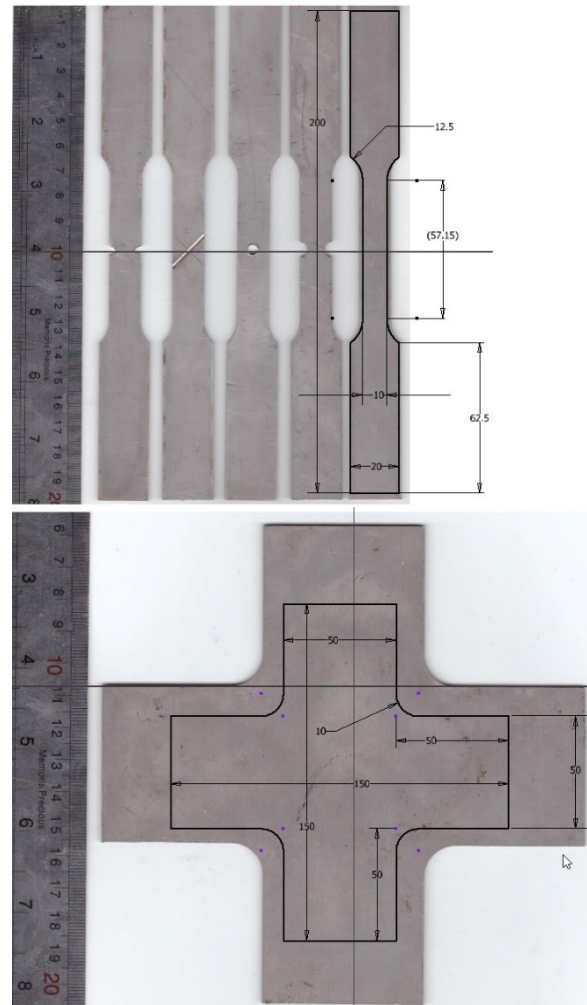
Photos of the experimental samples manufactured with the wire cutting machine. a) Tensile samples with and without notch, b) equiaxial tensile sample
